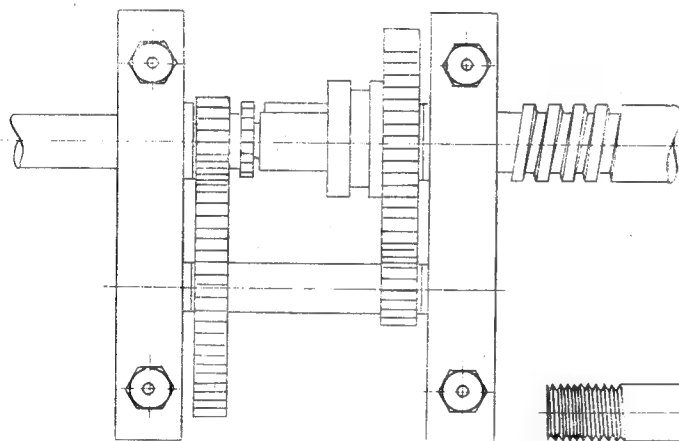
DETAILS OF A USEFUL ADDITION TO A SIMPLE SCREWCUTTING LATHE
